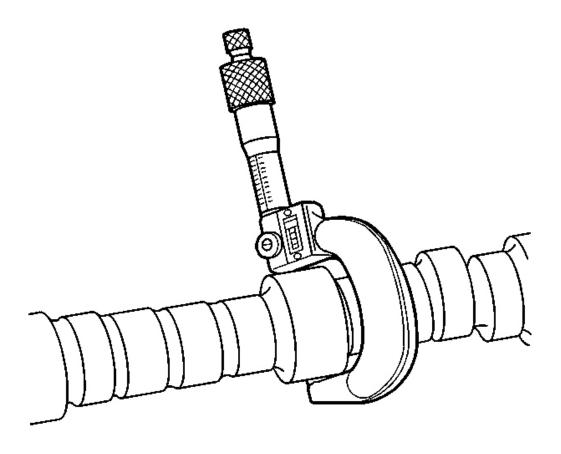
Measuring Engine Camshaft Journals Courtesy of GENERAL MOTORS CORP.
